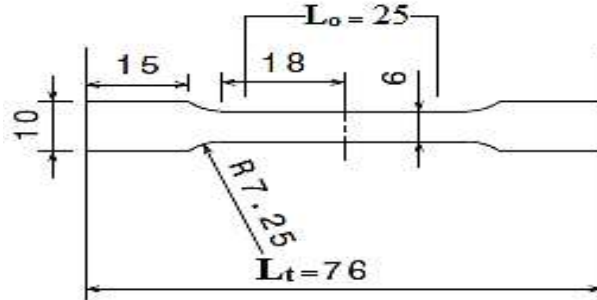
The exact geometrical dimensions of the mini samples in mm.
